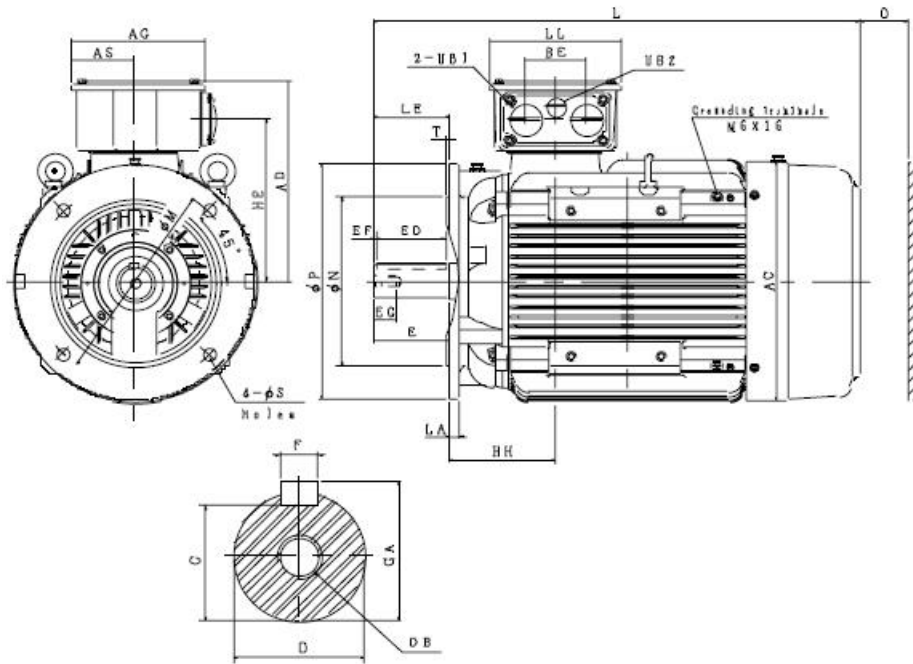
Outline drawing of cast iron design, flange version, mounting B5, frame size 200
